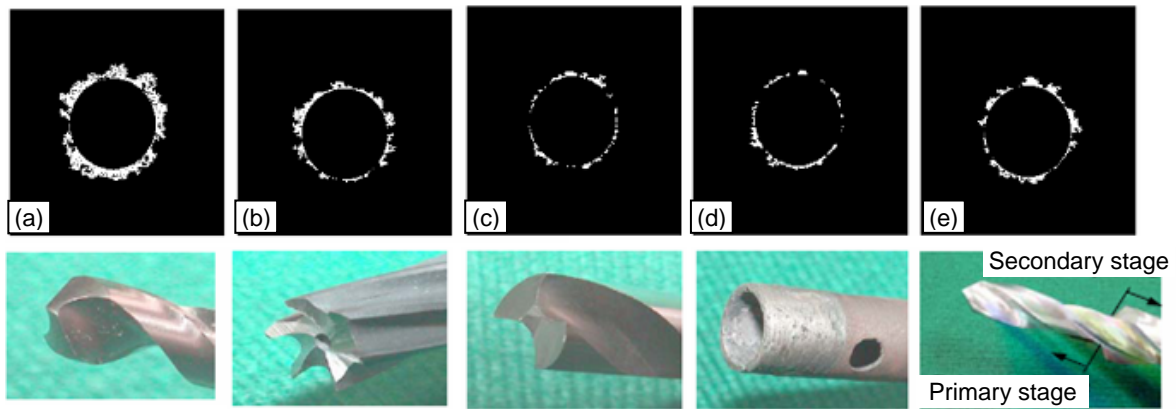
Various drill types/designs (diameter = 10 mm, spindle speed = 100 rpm, feed = 0.012mm/rev) (a) twist drill, (b) saw drill, (c) candlestick drill, (d) core drill, (e) step drill [69]
